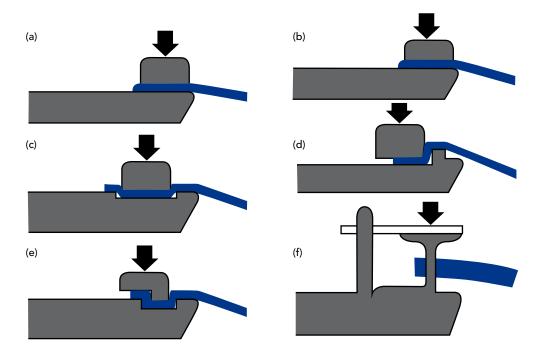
illustrates typical clamping designs to hold the hot sheet under the blowing ring using toggle clamps.
